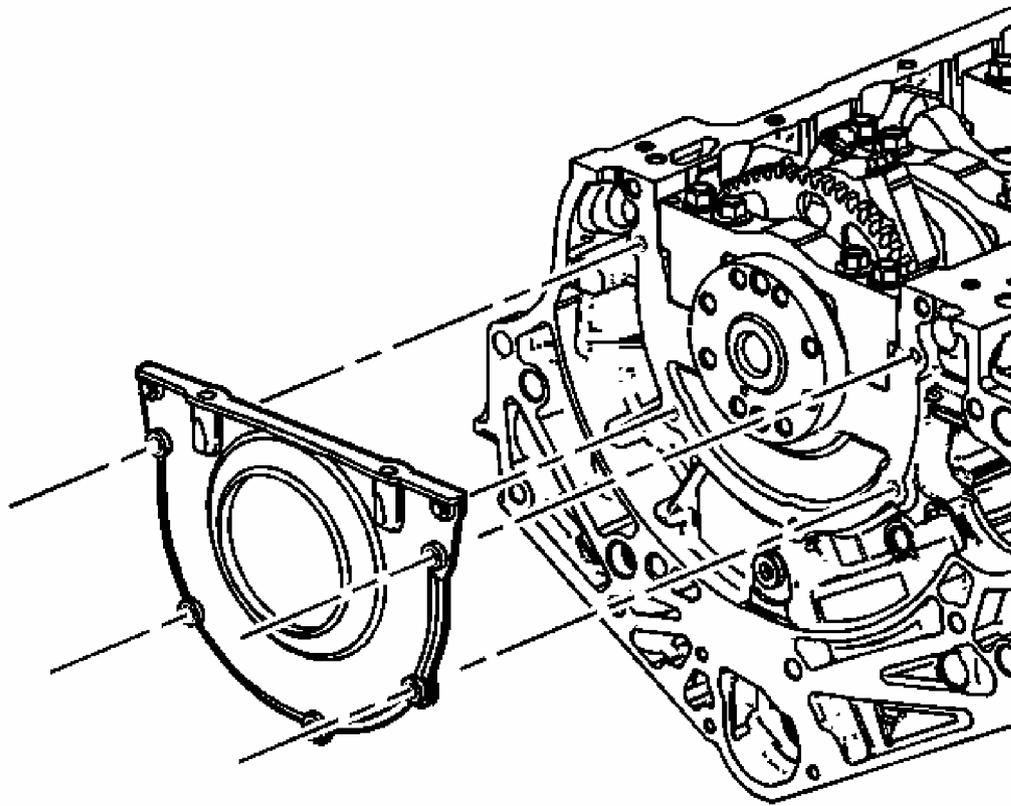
View Of Crankshaft Rear Oil Seal Housing
